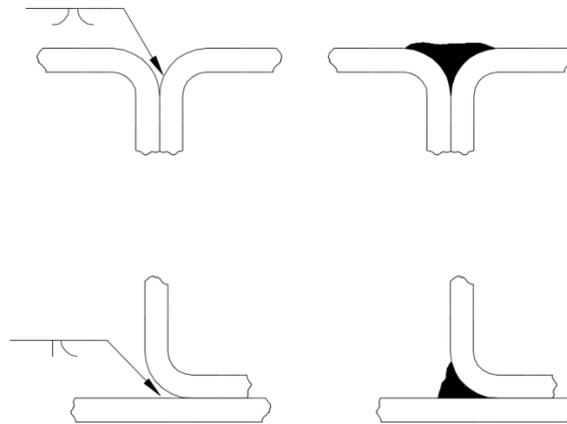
Flare V and flare bevel welds for rounded corner joints
